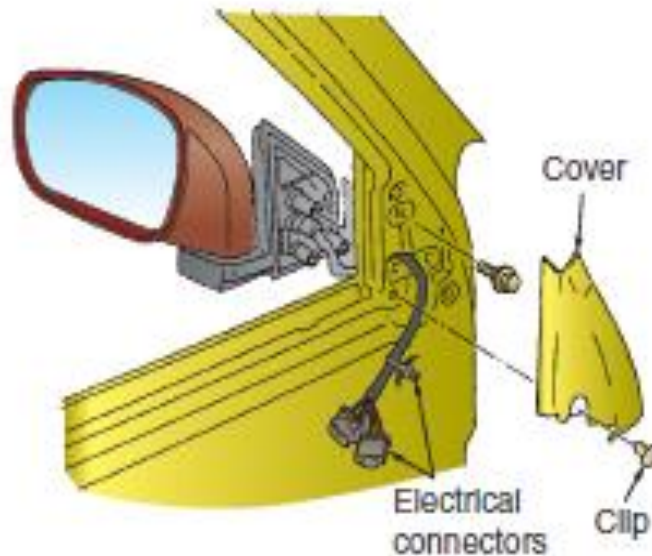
Outside rearview mirrors are usually held on by several small bolts or nuts. After removing the door inner trim panel, you can remove the two or three nuts that secure the outer rearview mirror to the door. Make sure you position any rubber gasket properly between the mirror housing and the door skin. Quite often, only the rearview mirror glass is broken. You can purchase and install just the mirror glass. Sometimes the rearview mirror glass is held on with clips, but usually it is adhesive-bonded in place. Use a heat gun to soften the adhesive on the broken mirror. Twist the mounting pad 30 degrees each way until it releases from the glass. Then use a putty knife or similar tool to pry off the old mirror. If the mirror has a heating element, it can be reused if still in working condition. Apply recommended adhesive to the back of the mirror and tape it in place. Allow the adhesive to cure for the recommended amount of time before tape removal.
